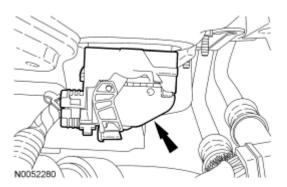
Identifying Transaxle Control Electrical Connector Courtesy of FORD MOTOR CO.
